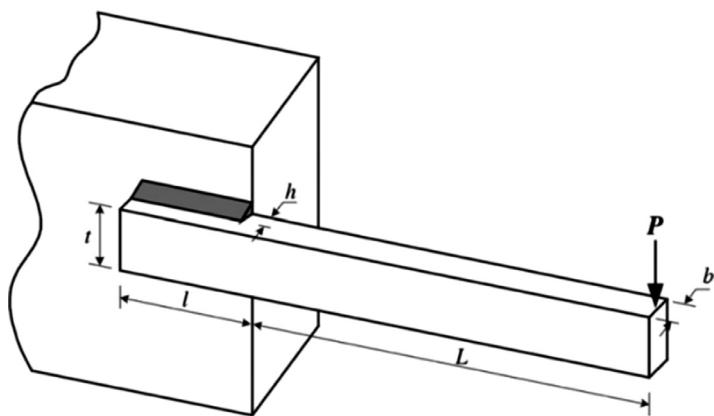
Schematic view of the welded beam problem [44].
